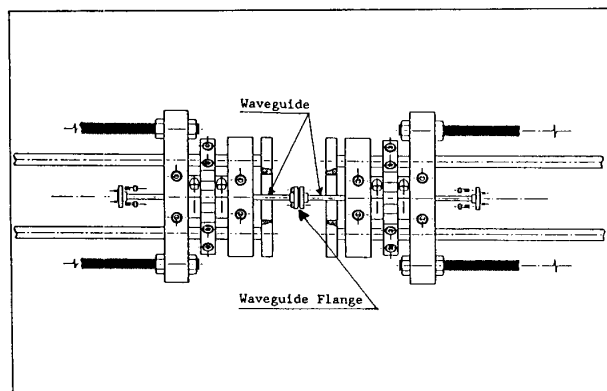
Generator to load connection with two millimeter alignment fixtures.
